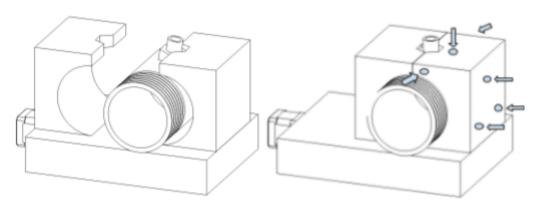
Main body clamp with 3-2-1 clamping forces
